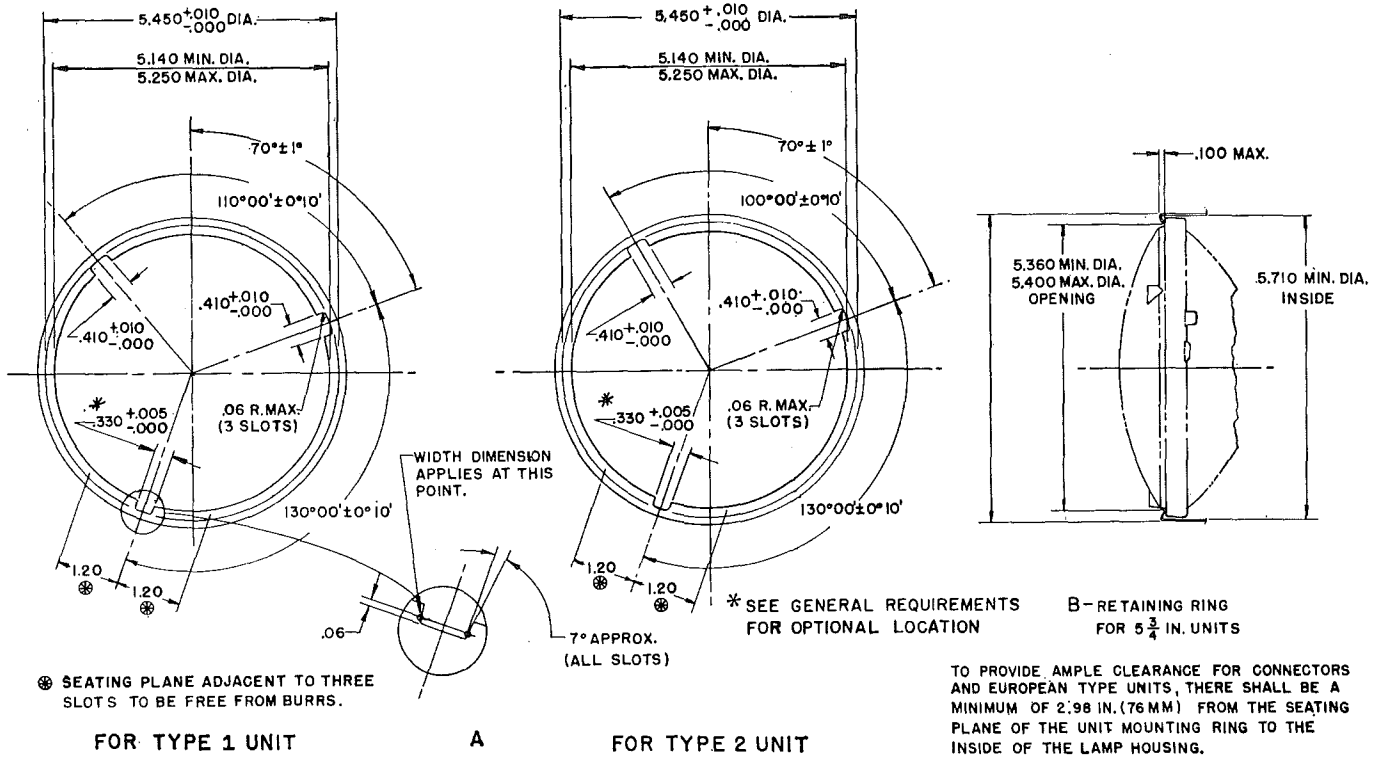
(A) FRONT VIEW OF SLOTS OR NOTCHES FOR 5/8 IN. DIAMETER SEALED BEAM HEADLAMP MOUNTING RING OR LAMP BODY, AND (B) SEALED BEAM HEADLAMP UNIT RETAINING RING
